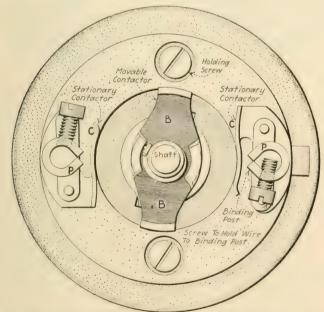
Single-pole, rotating-button snap switch having end-contactor mechanism. (Switch open, button and cover removed.)
